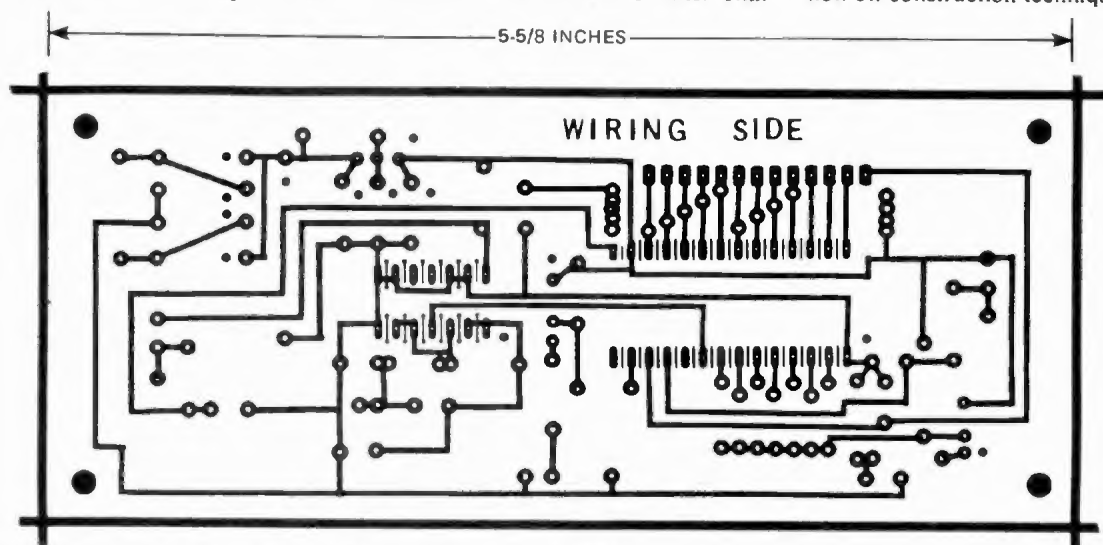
PC BOARD foil pattern. Dots in corners indicate position of mounting holes.
